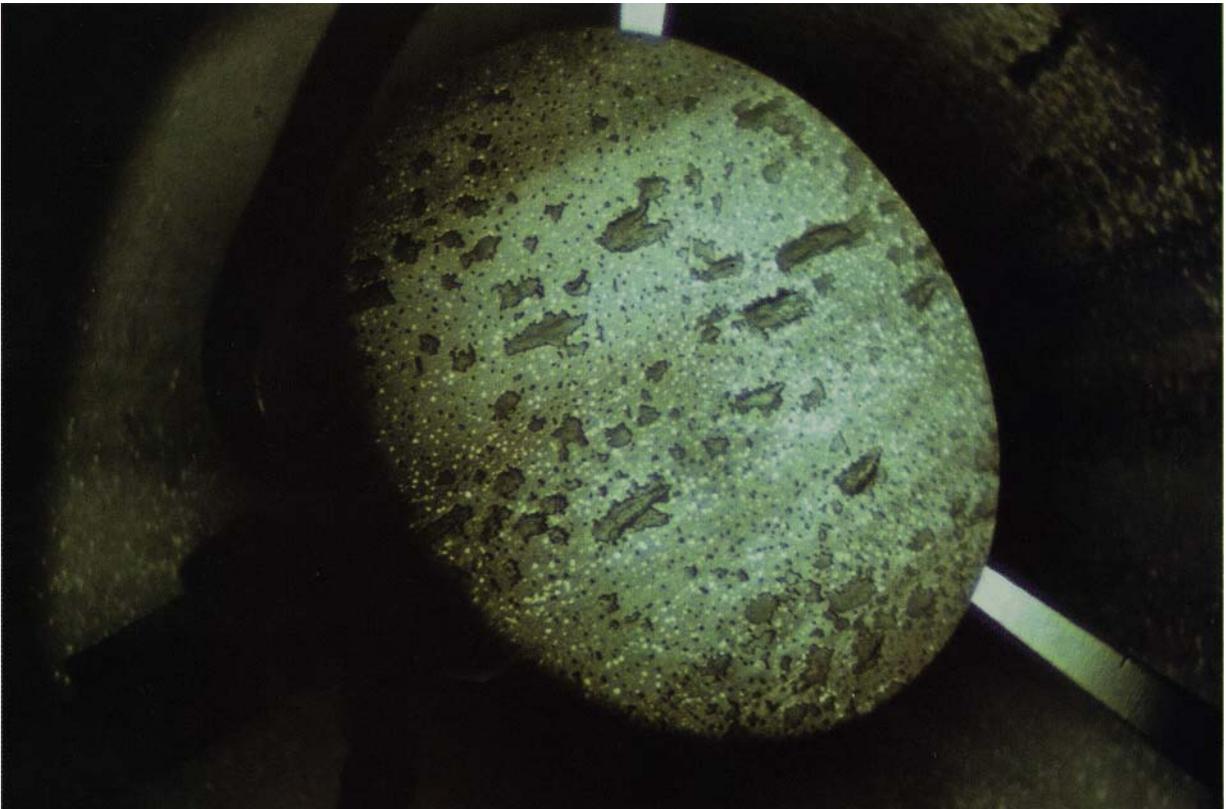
120MM M256 Tube: Heavy chrome chipping of bore with some light bore erosion.
